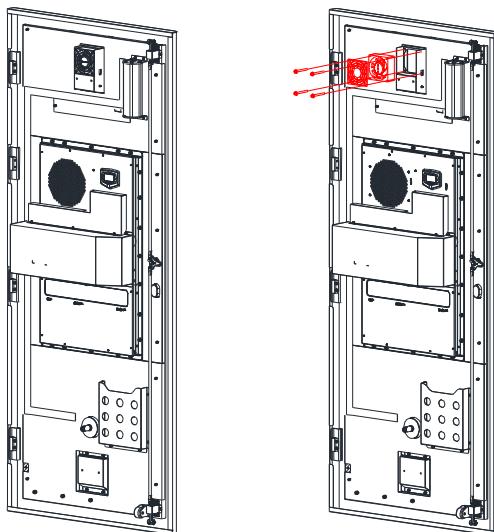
Hydrogen Exhaust Fan Disassembly Instruction Diagram
